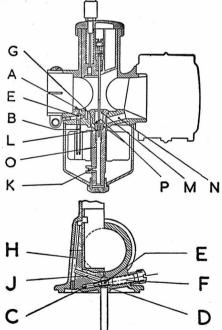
Exploded view of Villiers S.19 and S.25 carburetors.
